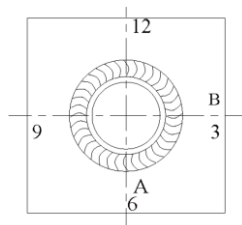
Cutting Position of Macro Sections of Pipe-to-Plate Assembly
